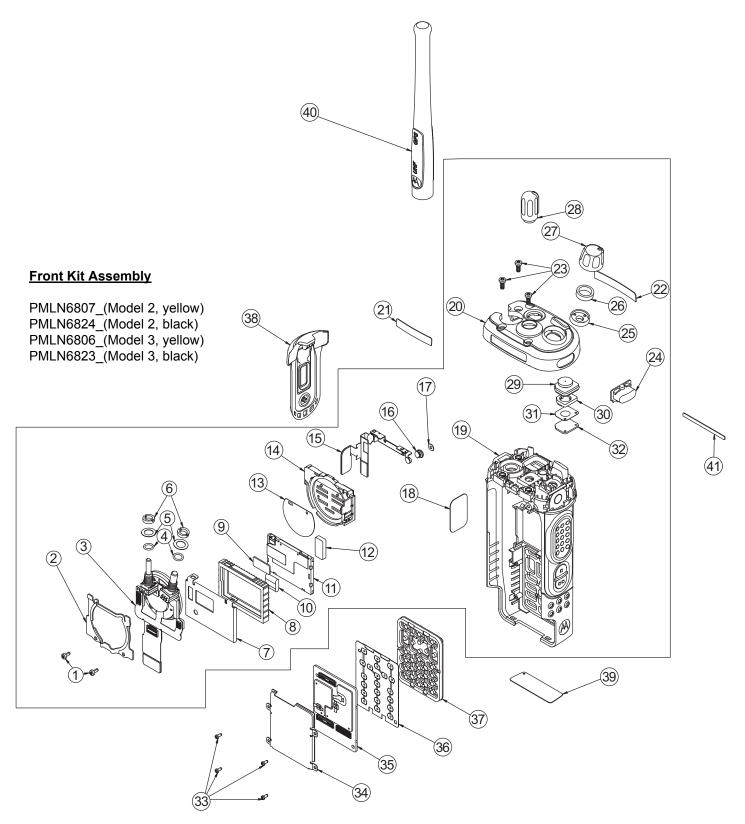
APX 2000/ APX 4000 (Two Knobs) Front Kit Exploded View
